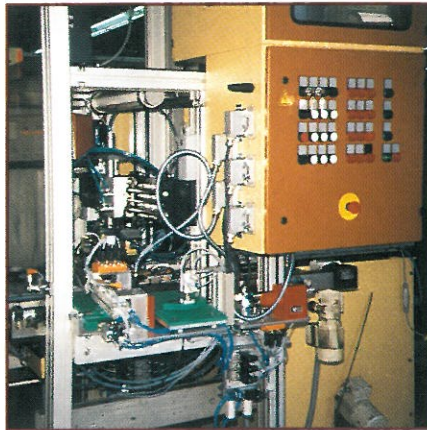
Integrated eddy current test system in feed to grinding machine.
